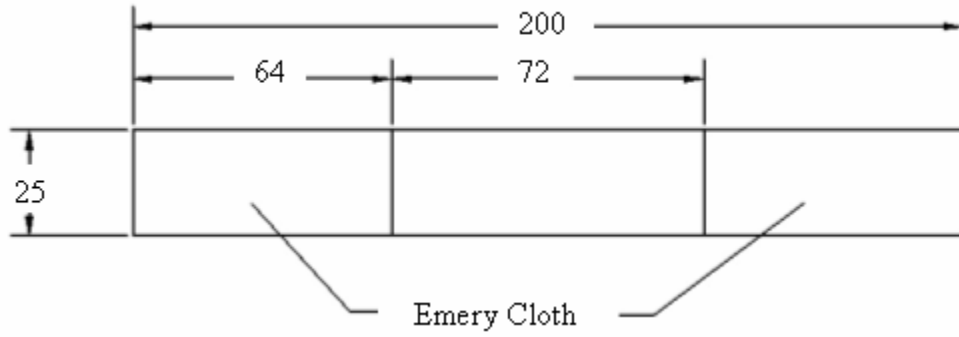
Dimensions in millimeter of coupon used in tensile test.
